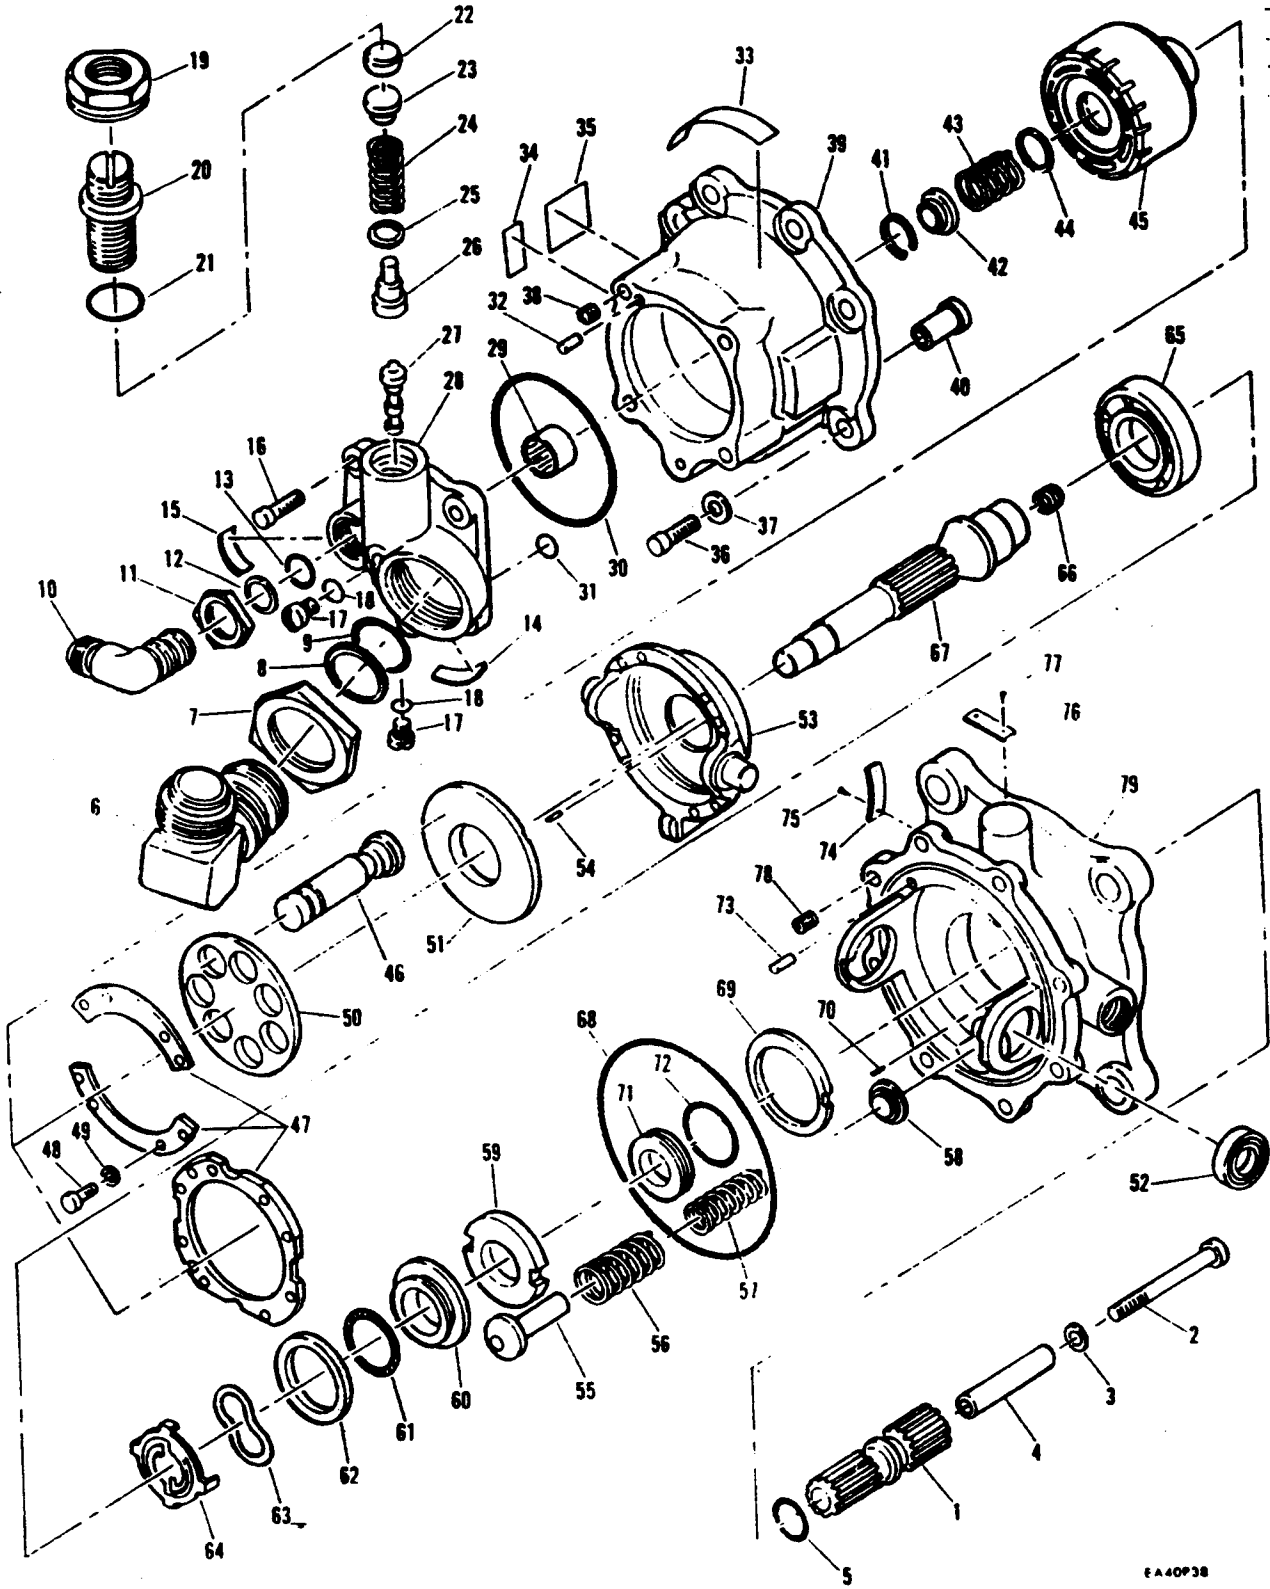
In-Line, Variable Displacement Hydraulic Pump Assembly, Exploded View
